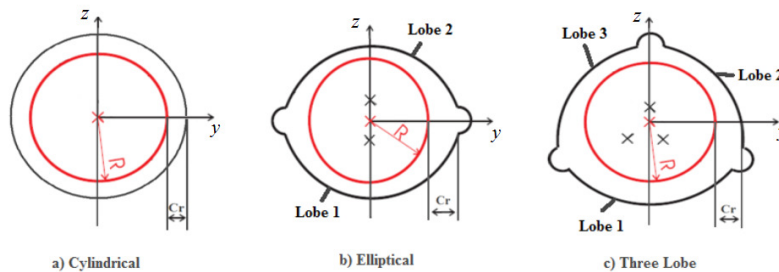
Design of Cylindrical, Elliptical and Three-Lobe Bearings
